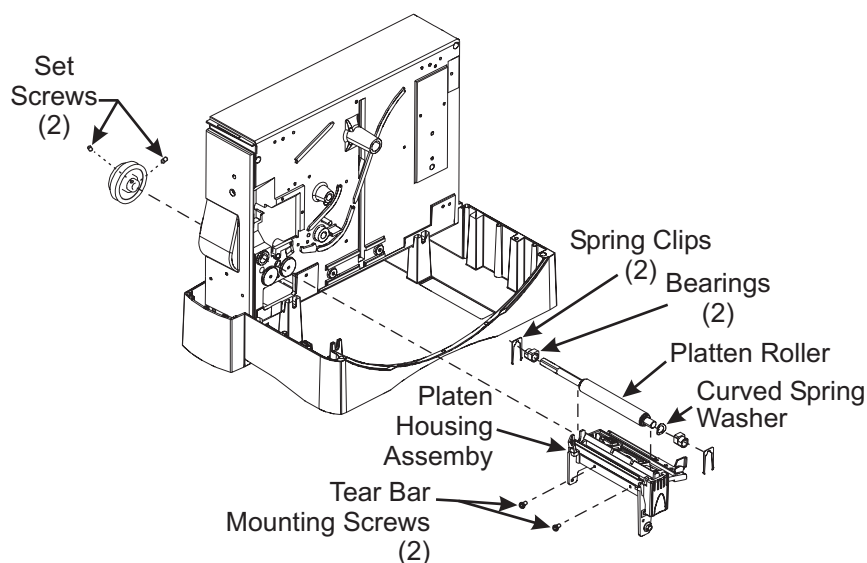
Platen Roller Assembly (Z4M Shown)
